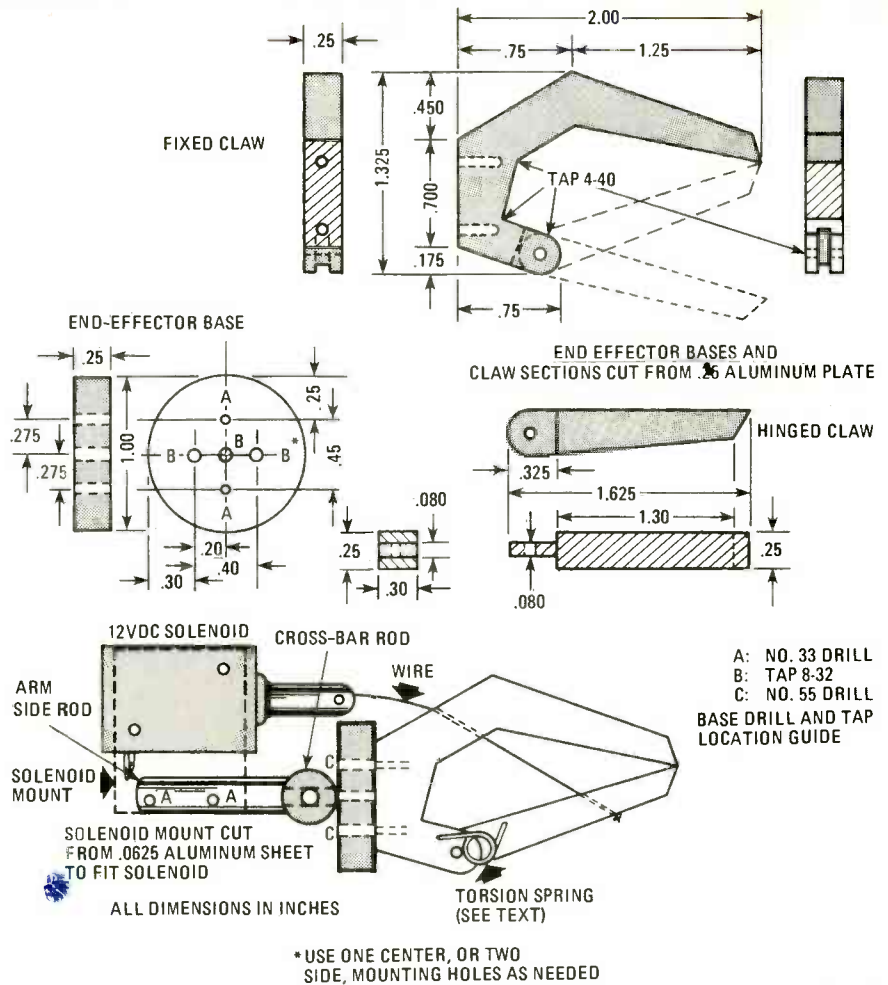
CLAW-TYPE end-effector assembly drawing. This is a heavier-duty mechanism than the finger-type and you may want one of each.
